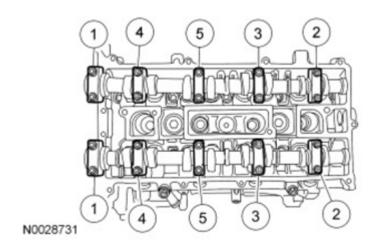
Identifying Camshaft Bearing Cap Bolts Loosening Sequence Courtesy of FORD MOTOR CO.
